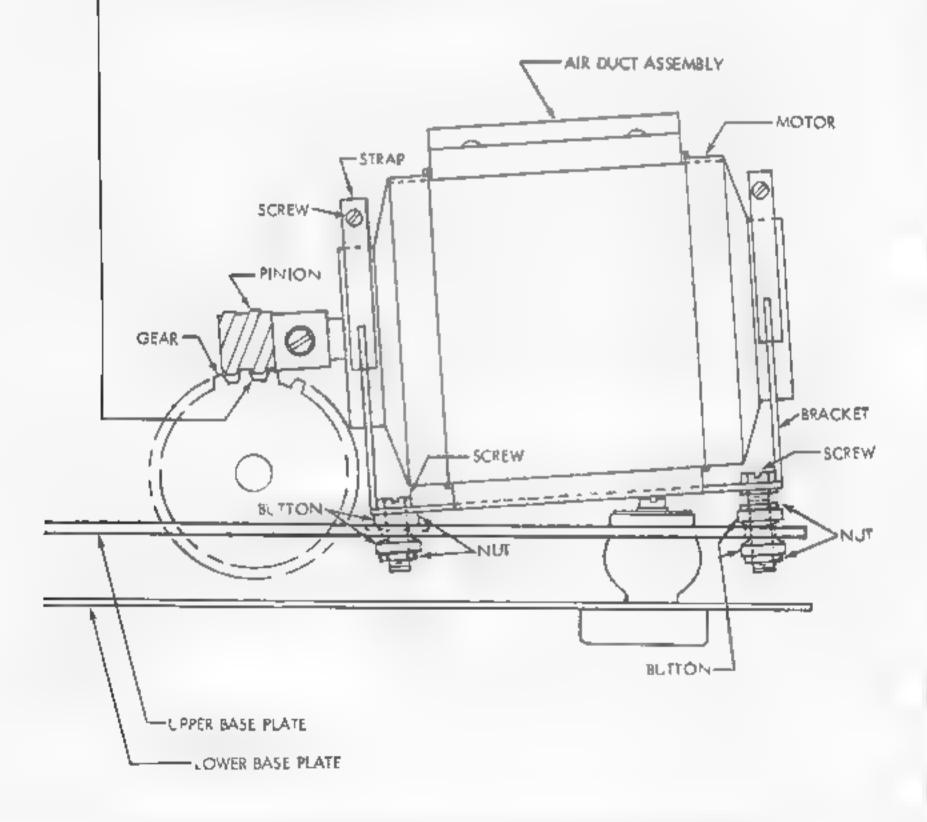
MOTOR UNIT FOR RECEIVE ONLY COMPACT TAPE PRINTER SET
